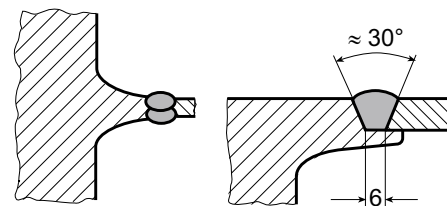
Welding flange on steel castings and forgings
